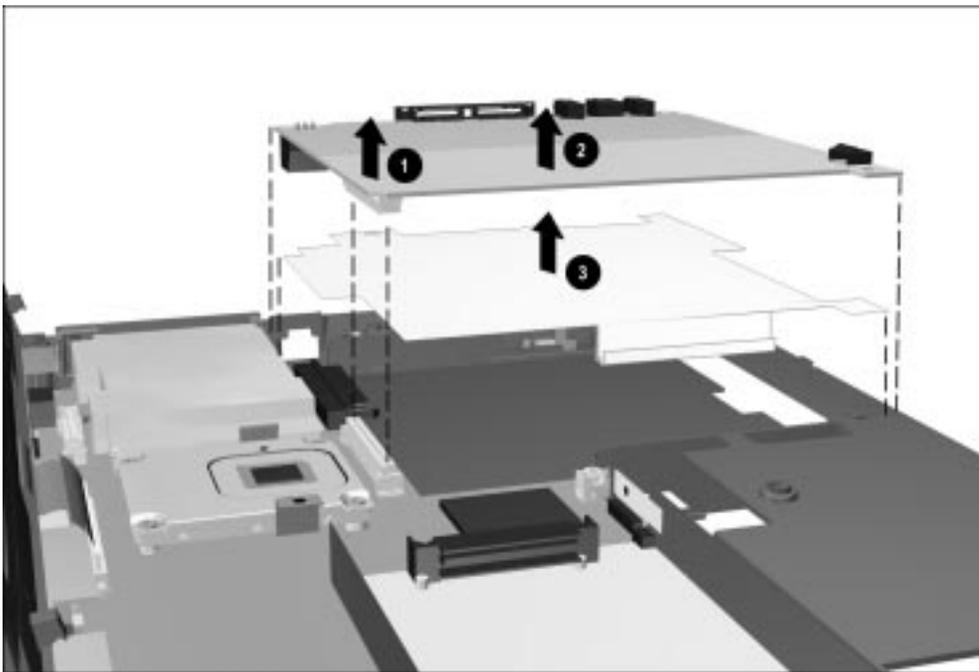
Removing the Audio/Modem Board and MultiBay Shield
